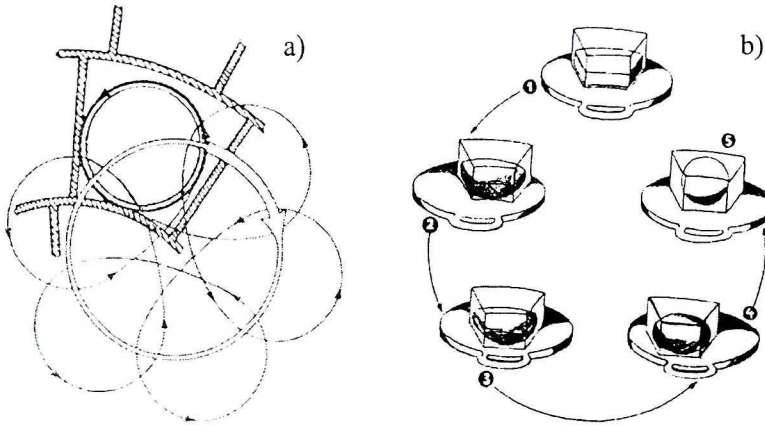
Forming pieces into spherical forms on a movable table in hollows of star cutter
